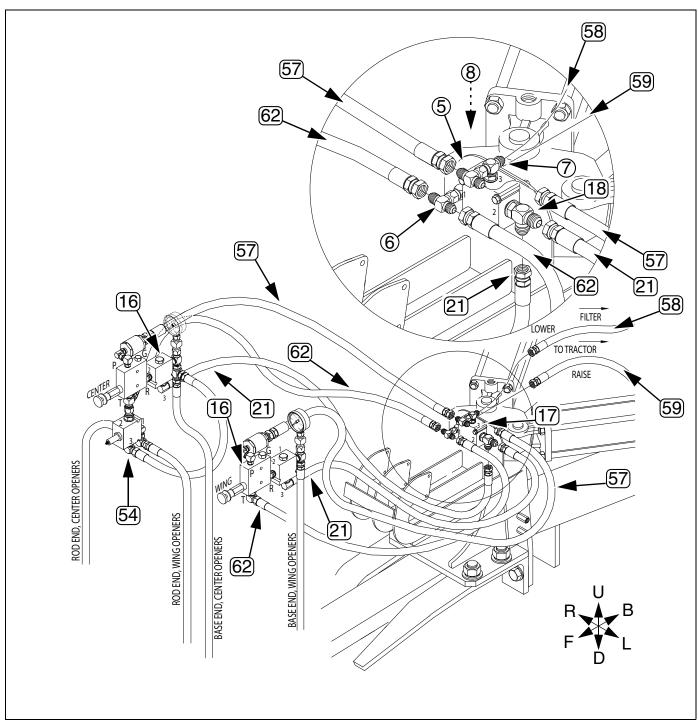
2S DD1162+ Shuttle Valve Hose Routing
